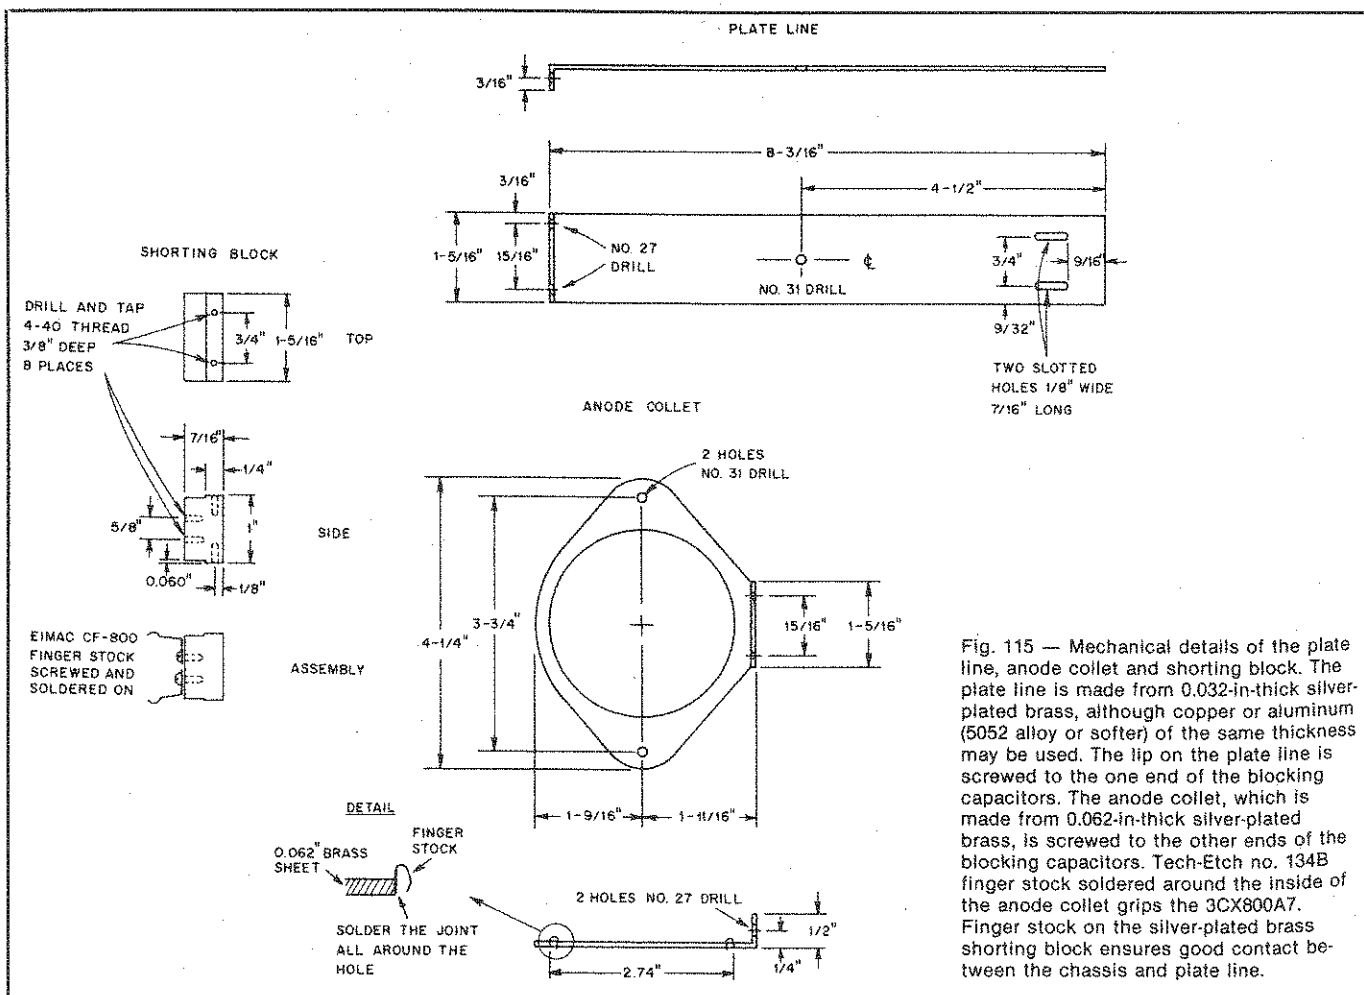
Mechanical details of the plate line, anode collet and shorting block. The plate line is made from 0.032-in-thick silver-plated brass, although copper or aluminum (5052 alloy or softer) of the same thickness may be used. The lip on the plate line is screwed to the one end of the blocking capacitors. The anode collet, which is made from 0.062-in-thick silver-plated brass, is screwed to the other ends of the blocking capacitors. Tech-Etch no. 134B finger stock soldered around the inside of the anode collet grips the 3CX800A7. Finger stock on the silver-plated brass shorting block ensures good contact between the chassis and plate line.
